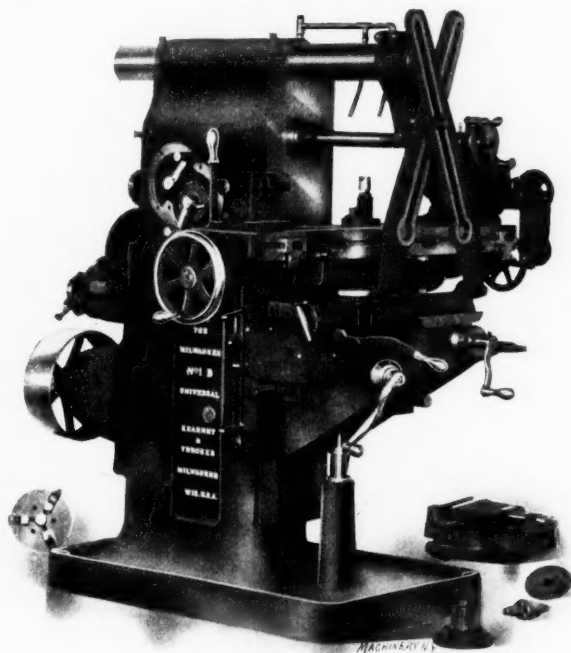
Milwaukee Gear-driven Universal Milling Machine.
